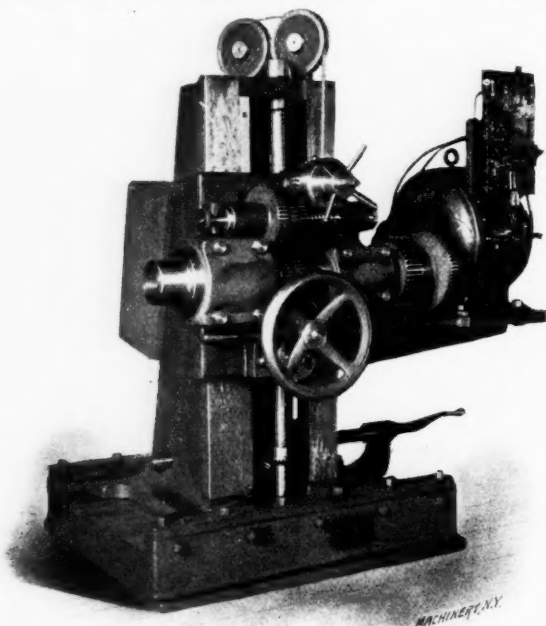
Drilling Device, Gridley Automatic Turret Lathe.
